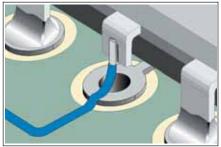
Acceptable* Wire soldered to clipped lead on component side. +
